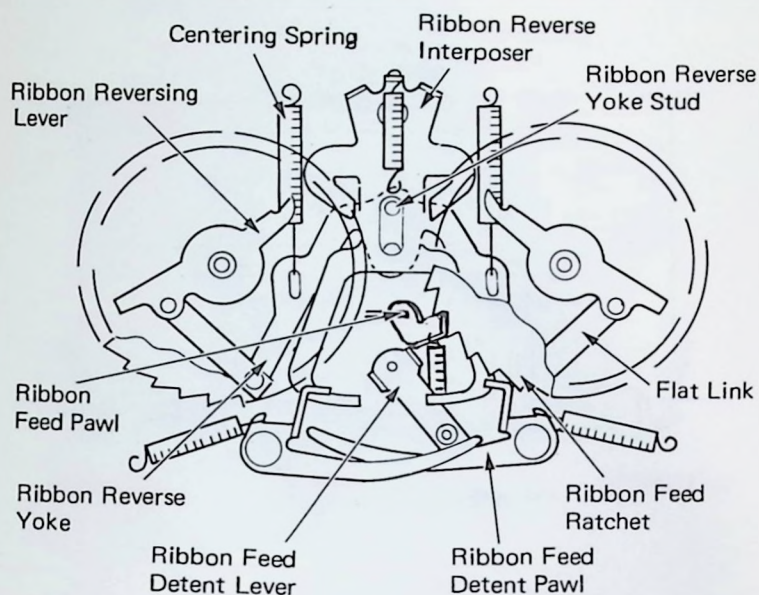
Ribbon Feed Pawl (Rest Position - Top View)
